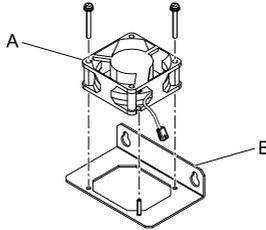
Remove the Circuit Board Cooling Fan Units
